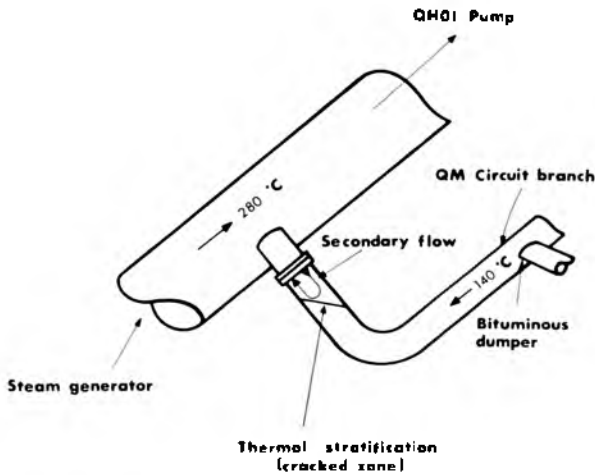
Moderator circuit branch piping scheme showing the stratified layer location.
